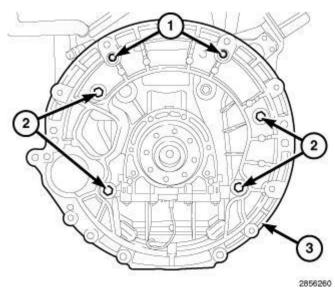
Transmission Adapter Plate & Bolts Courtesy of CHRYSLER LLC
